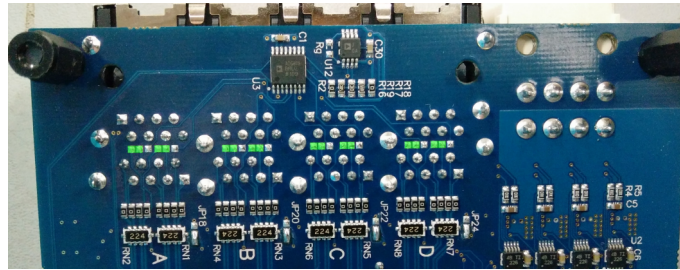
The yellow marked pins were soldered together to enable the RJ-45 ports.
